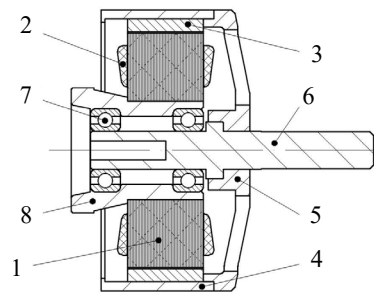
Sketch of the studied motor: 1 – magnetic core of the stator; 2 – stator winding; 3 – permanent magnets; 4 – rotor sleeve; 5 – rotor “crown”; 6 – shaft; 7 – bearings; 8 – structural stator sleeve
